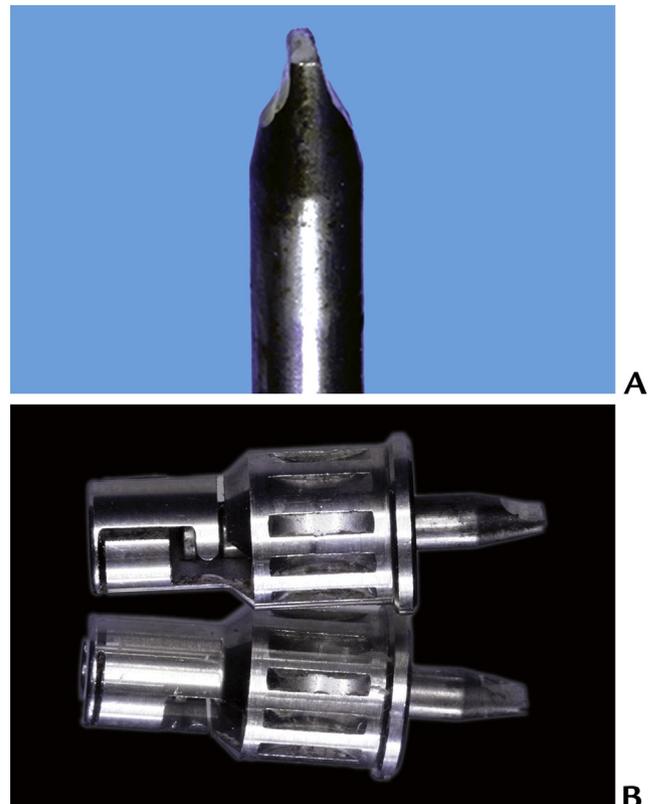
A, Round bur after modification. B, Assembly of custom screwdriver.
